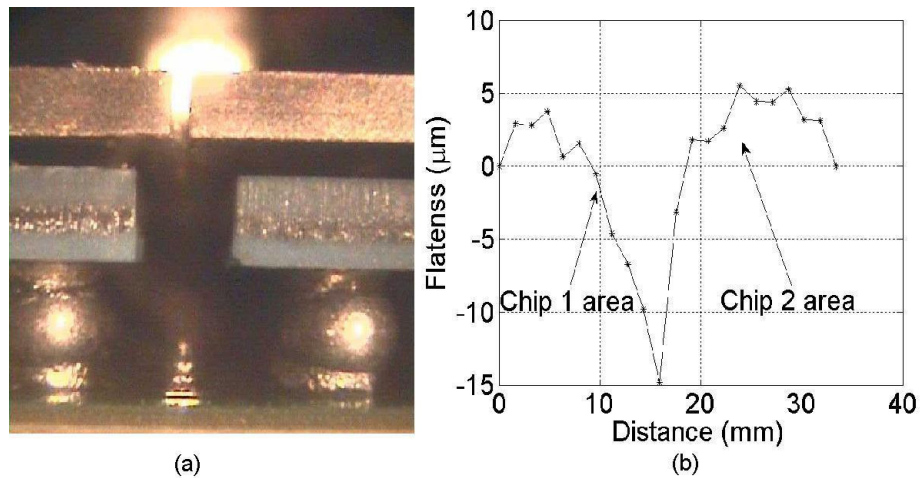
(a) Side view of assembled photodiode detector module with solder bumps and intermediate LTCC substrate (from author's publication I), (b) Flatness measurement on the chip surfaces after photodiode detector module assembly
